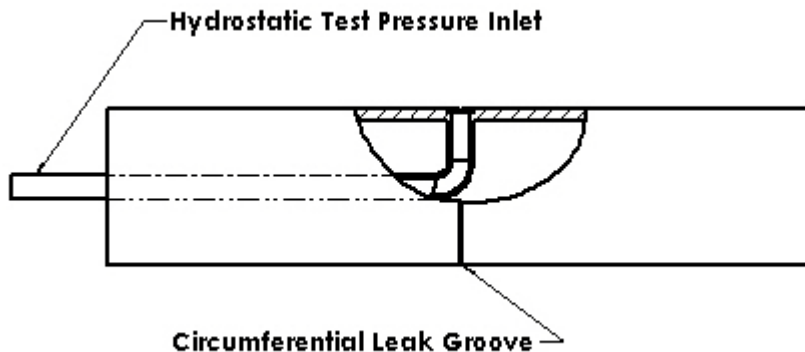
Cutaway view of the simulated 360 Degree Full Break Leak Test Fixture
